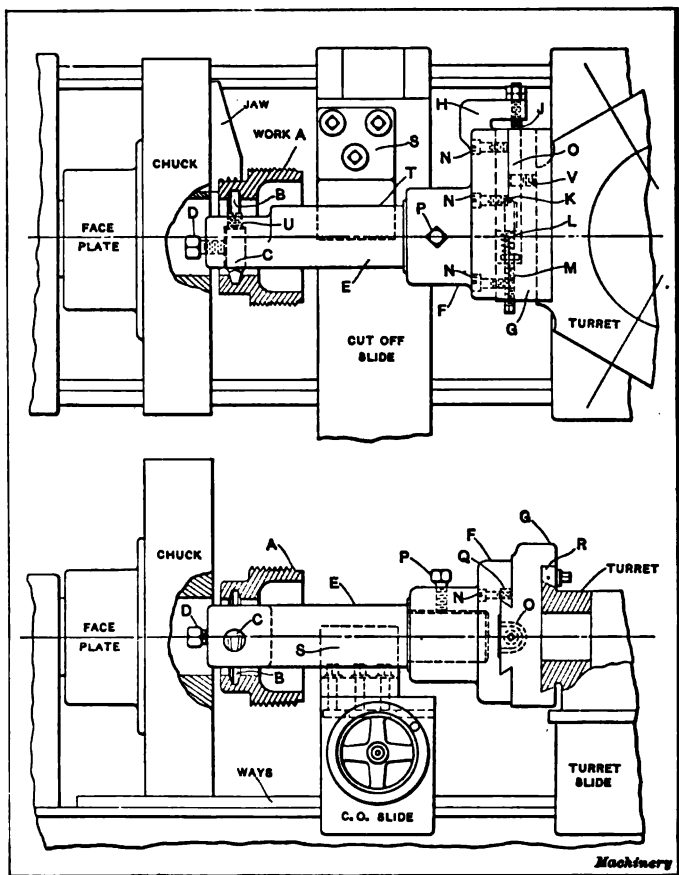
A Recessing Tool for an Automobile Bearing Retainer
